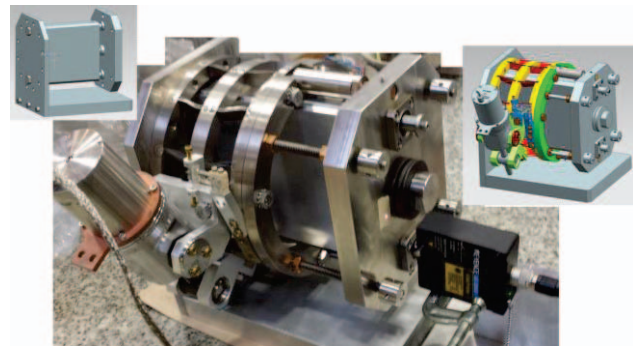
Prototype Tuner, assembled on the “cavity/He vessel mock-up” stand.
